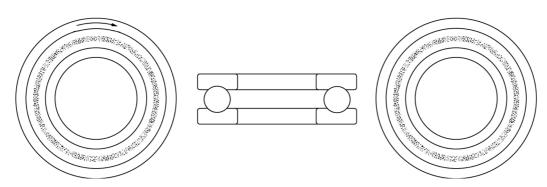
Uni-directional axial load — Rotating shaft washer – Stationary housing washer
